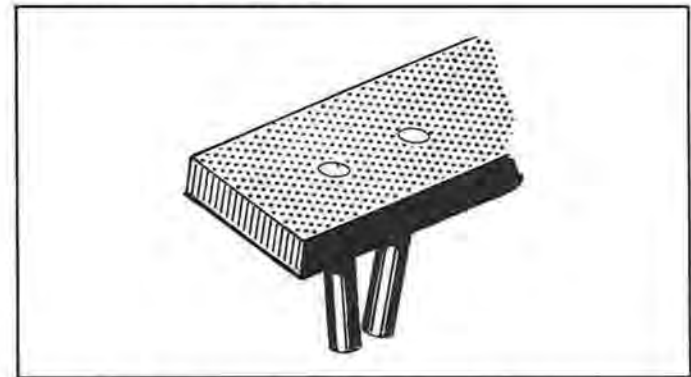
Pins bent together as shown will not support a hairspring along its width and will cause it to shimmy.
